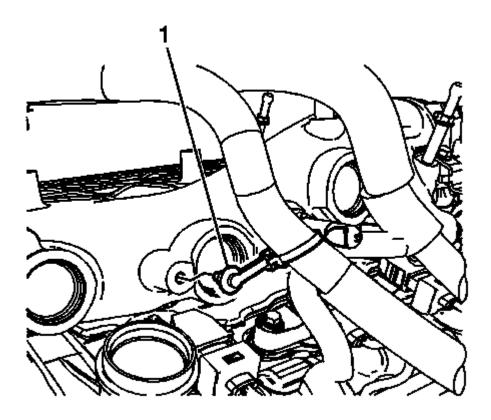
View Of Wiring Harness Retaining Bolt Courtesy of GENERAL MOTORS COMPANY
